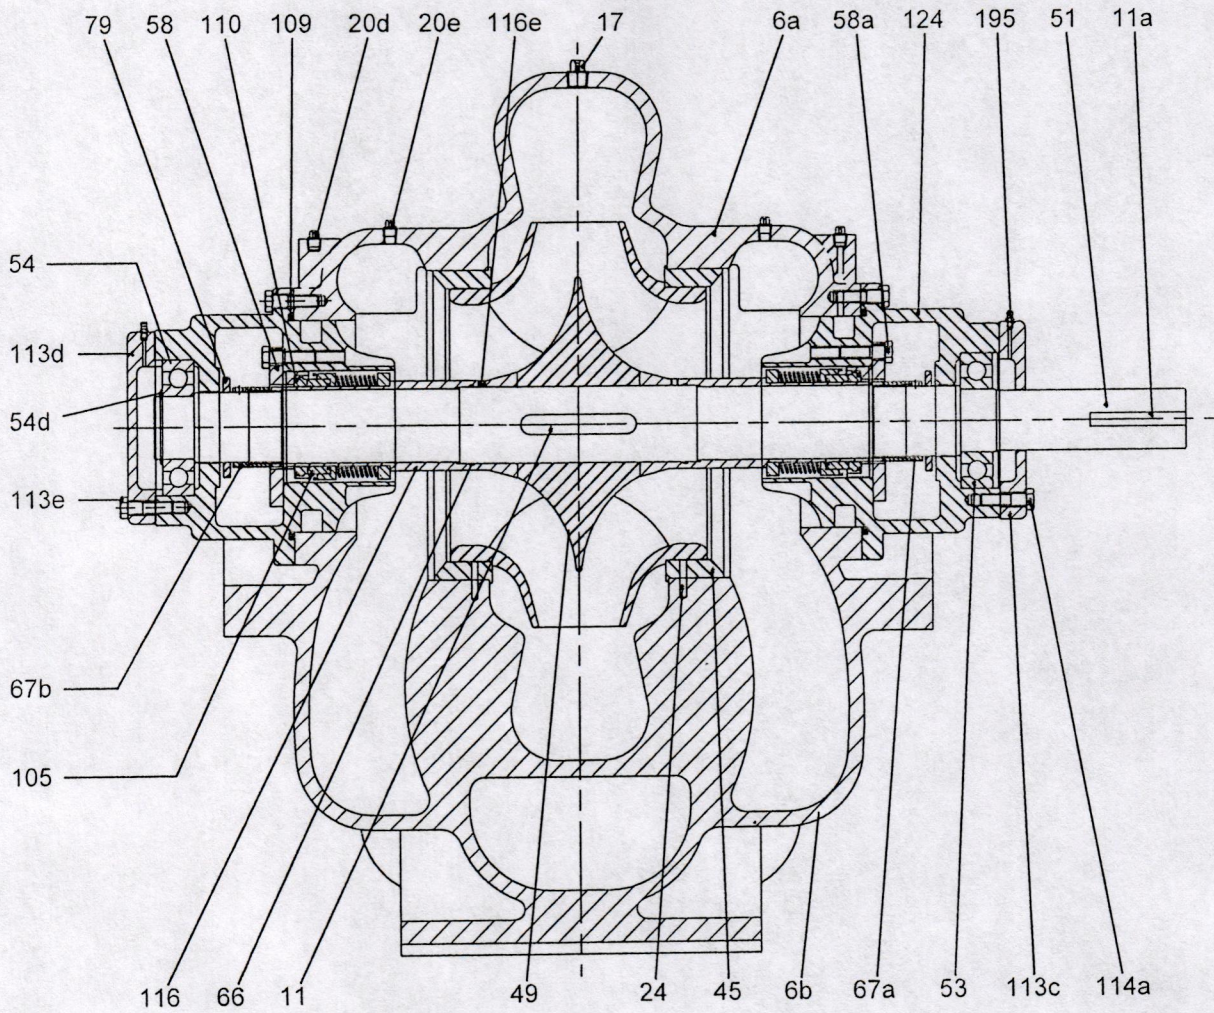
Sectional view, construction X4, with mechanical shaft seals
